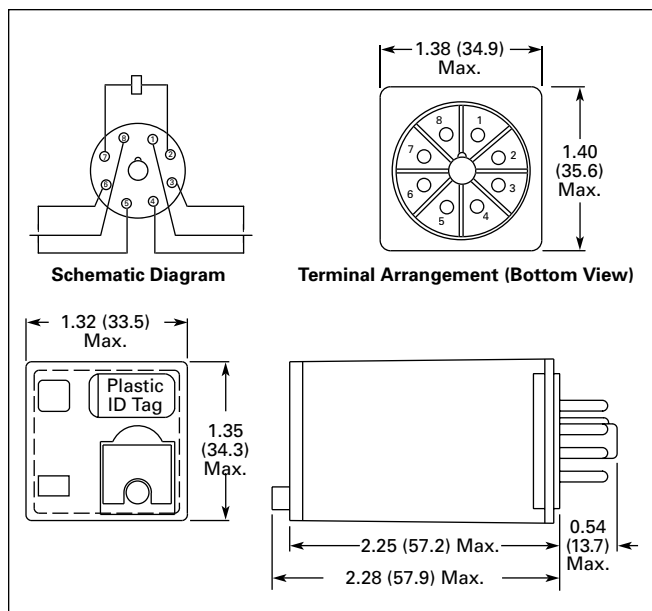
D3PA4 — Approximate Dimensions in Inches (mm)
